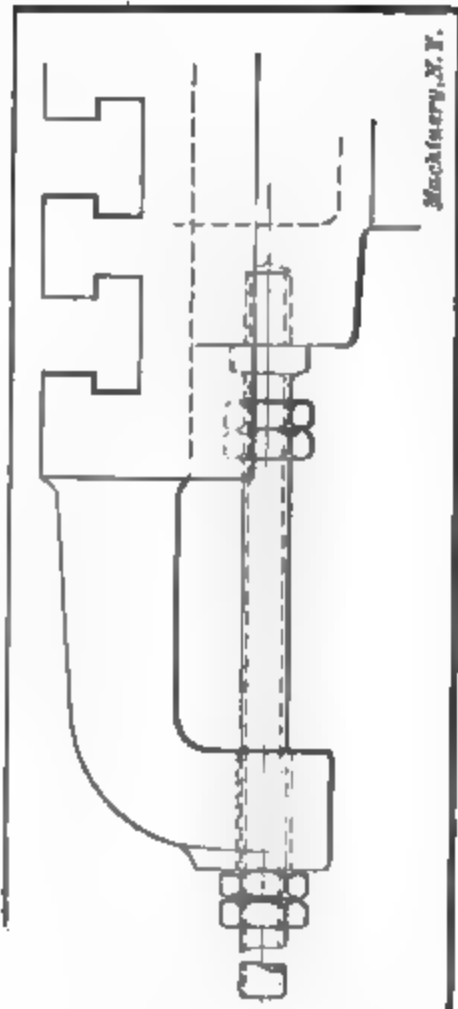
Efficient Type of Stop-red for Turret Lathe Cross-slide
